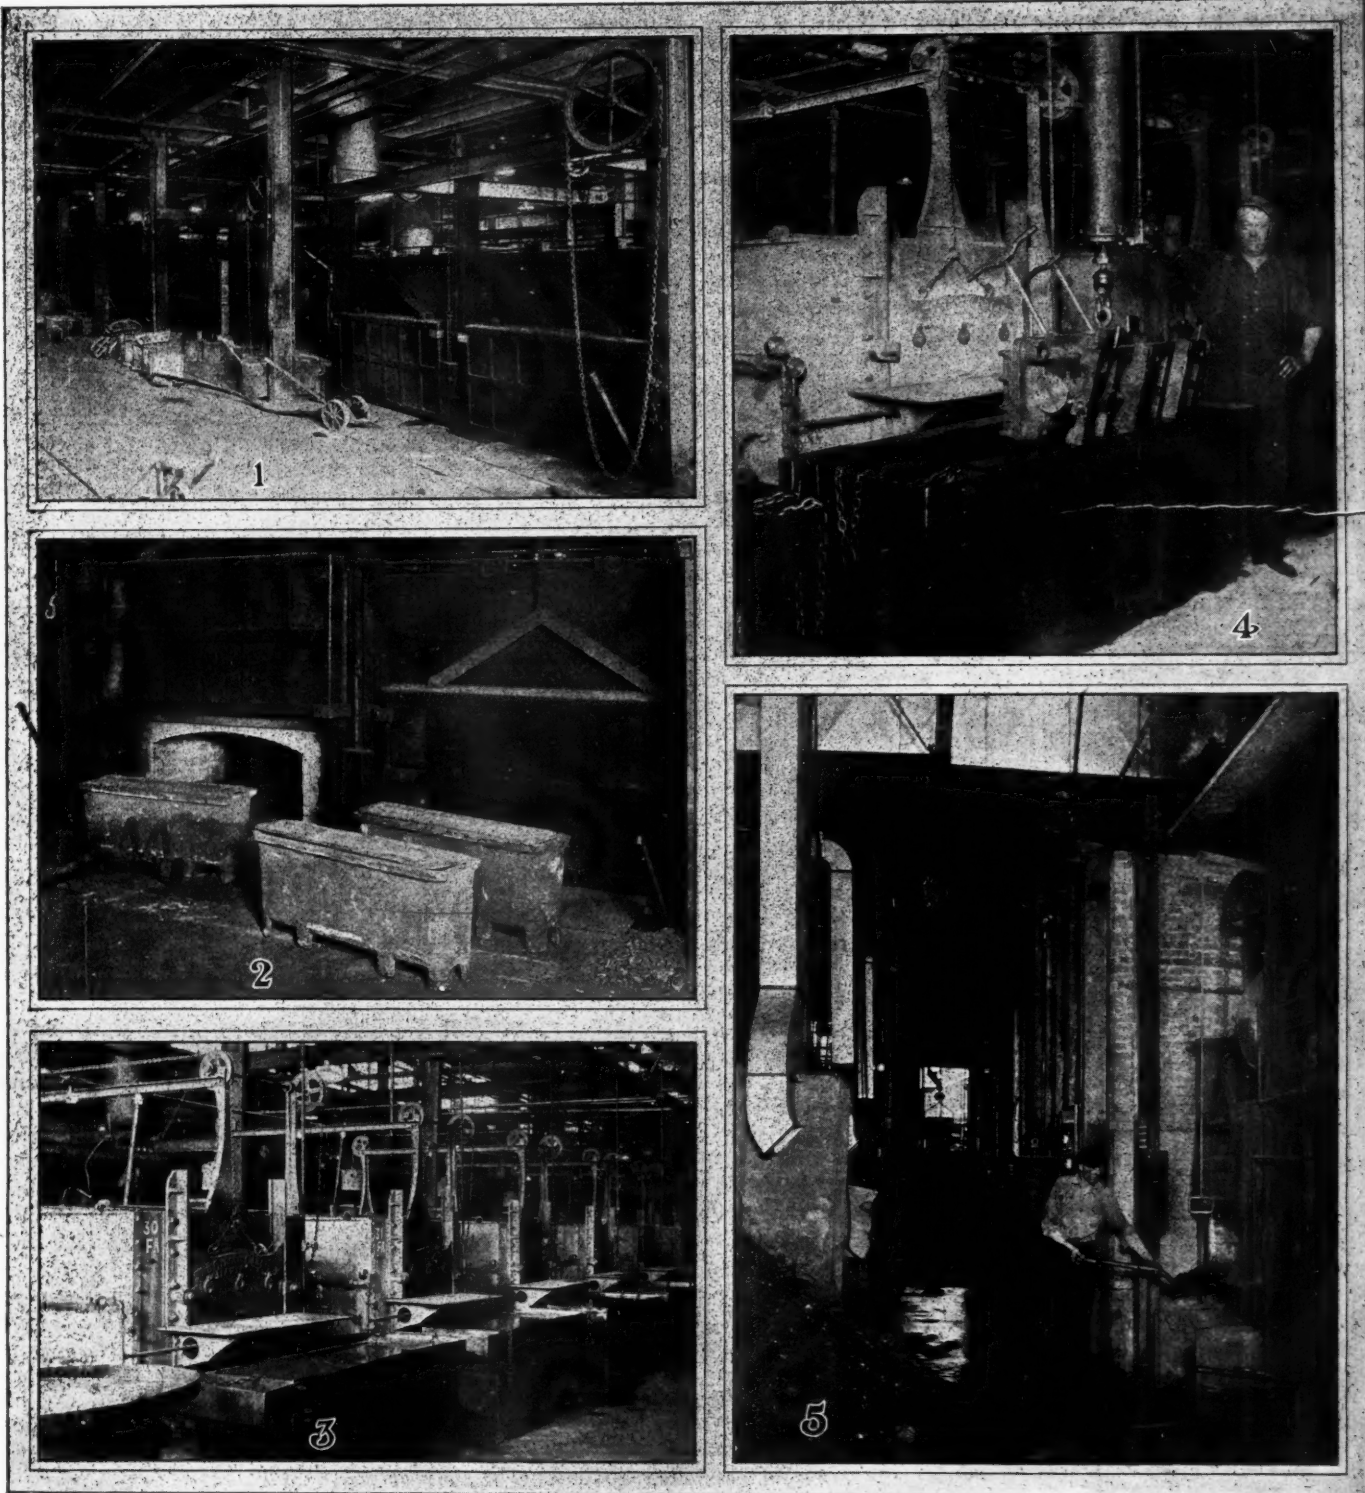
Ovens used in carburizing operation. Fig. 2—Carburizing boxes, in which shafts are placed before being put into ovens. Fig. 3—Furnaces and cooling tanks used in case-hardening. Fig. 4—Specially constructed die, in which shaft is placed when removed from furnace. When the shaft has been clamped in the die, the whole die is immersed in cooling tank. Fig. 5—Blower ventilating system is used throughout the heat-treating department. This illustration shows the installation in the firing pits
